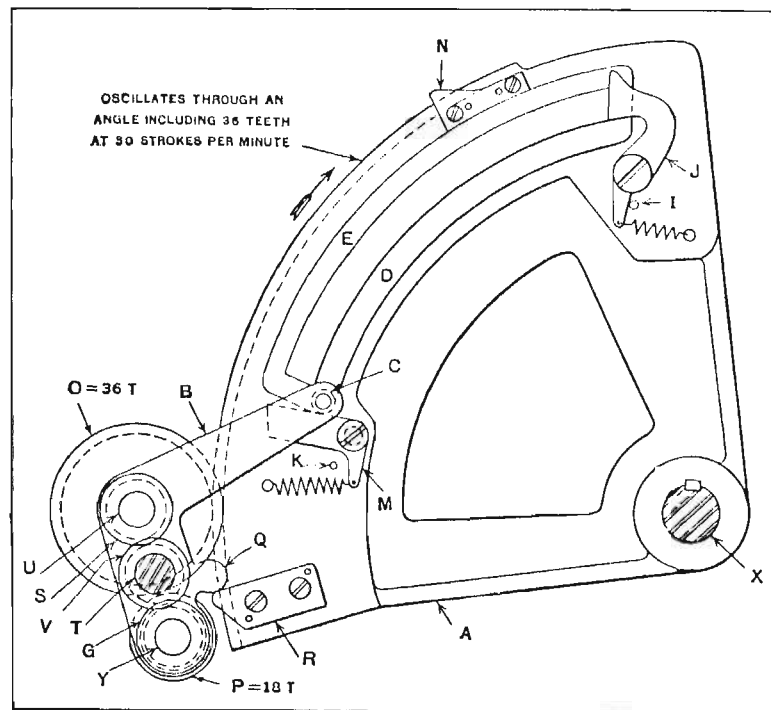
Mechanism for Converting Oscillating Motion into Reversing Motion
